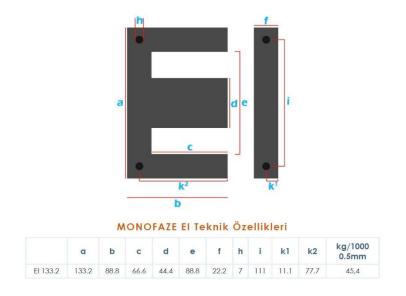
El133.2 core datasheet details (All dimensions are *in millimeters)
